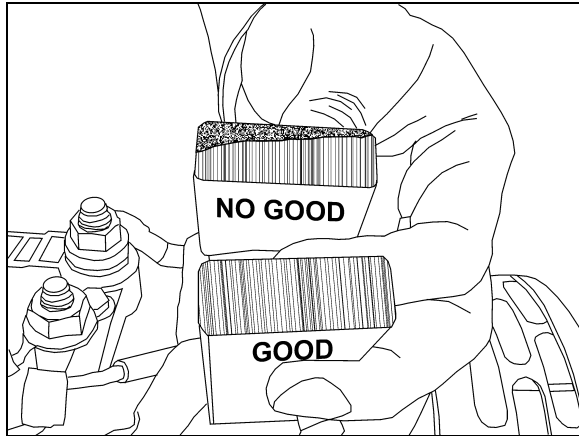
SEATING SURFACE OF THE BRUSH 22320
